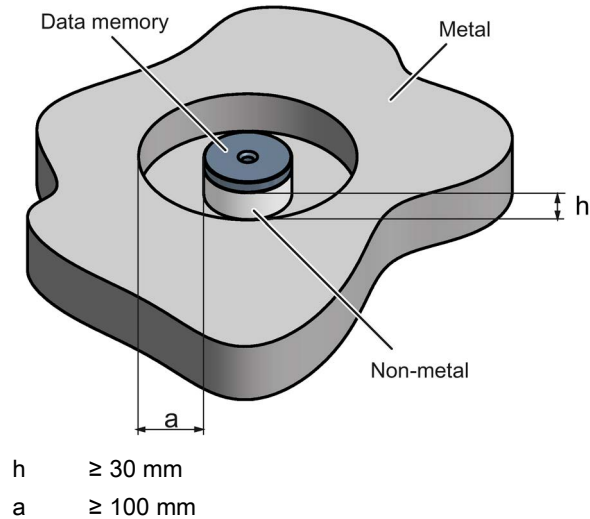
Flush-mounting of the MDS D139/D339 in metal with spacer
